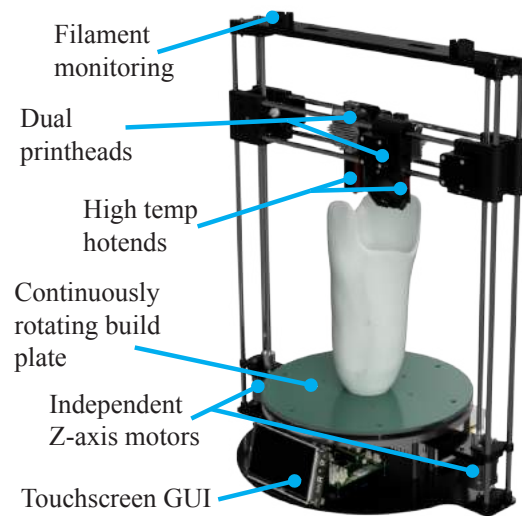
A 3D CAD render of the prototype polar 3D printer with a socket shown for scale
